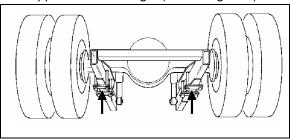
JACKING POINTS ON DRIVE AXLE
